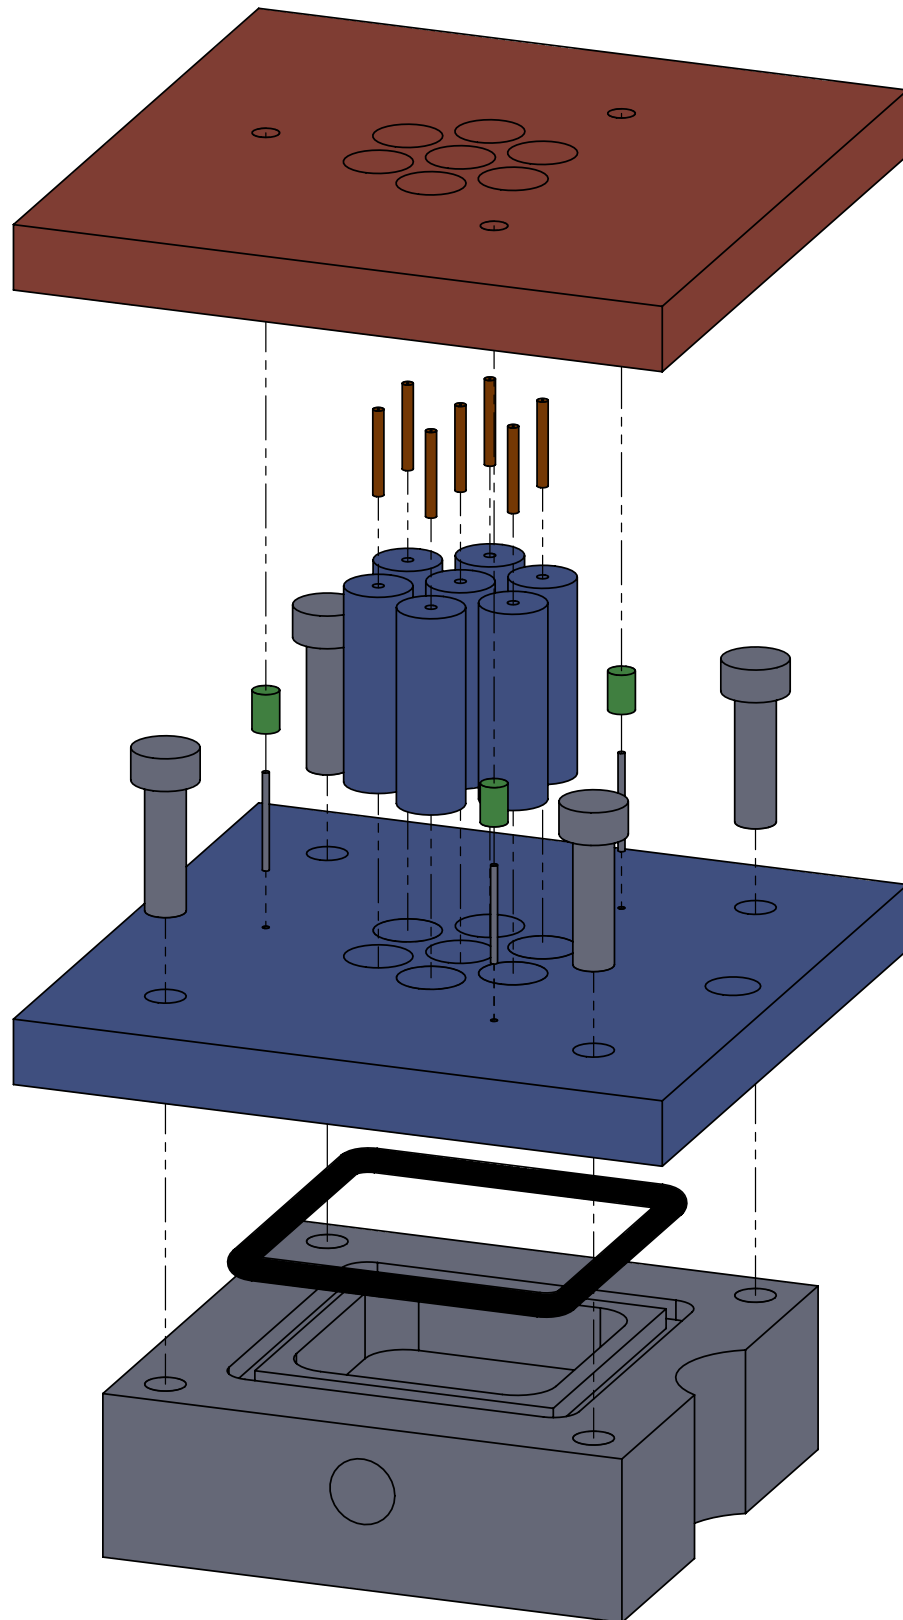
Exploded view of the design, tape to seal the vacuum between top and bottom plate as well as the connecting pressure and vacuum lines are omitted.
